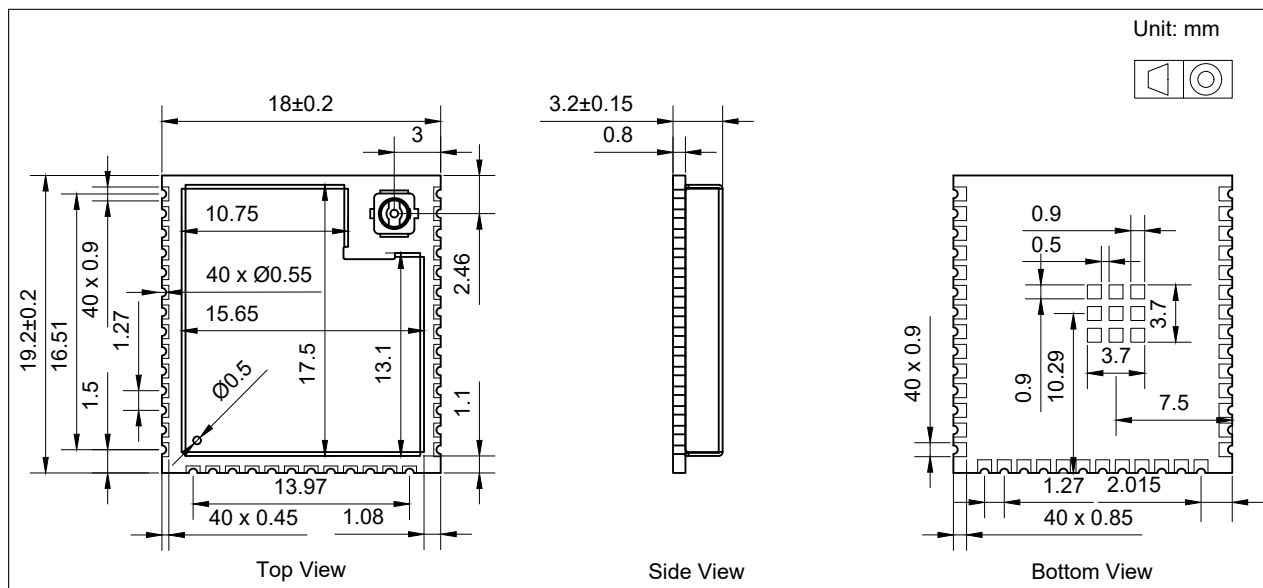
ESP32-S3-WROOM-1U Physical Dimensions
